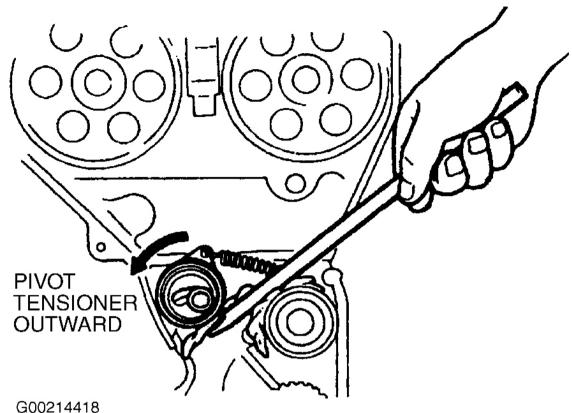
Loosening Tensioner Courtesy of KIA MOTORS AMERICA, INC.
